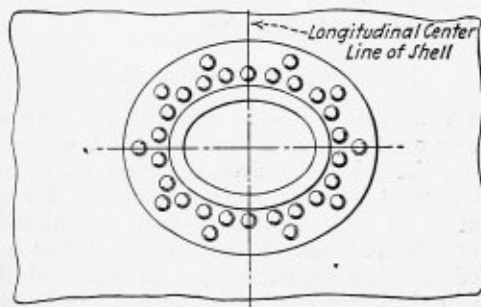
Method of riveting manhole frames to shells or drums with two rows of rivets
